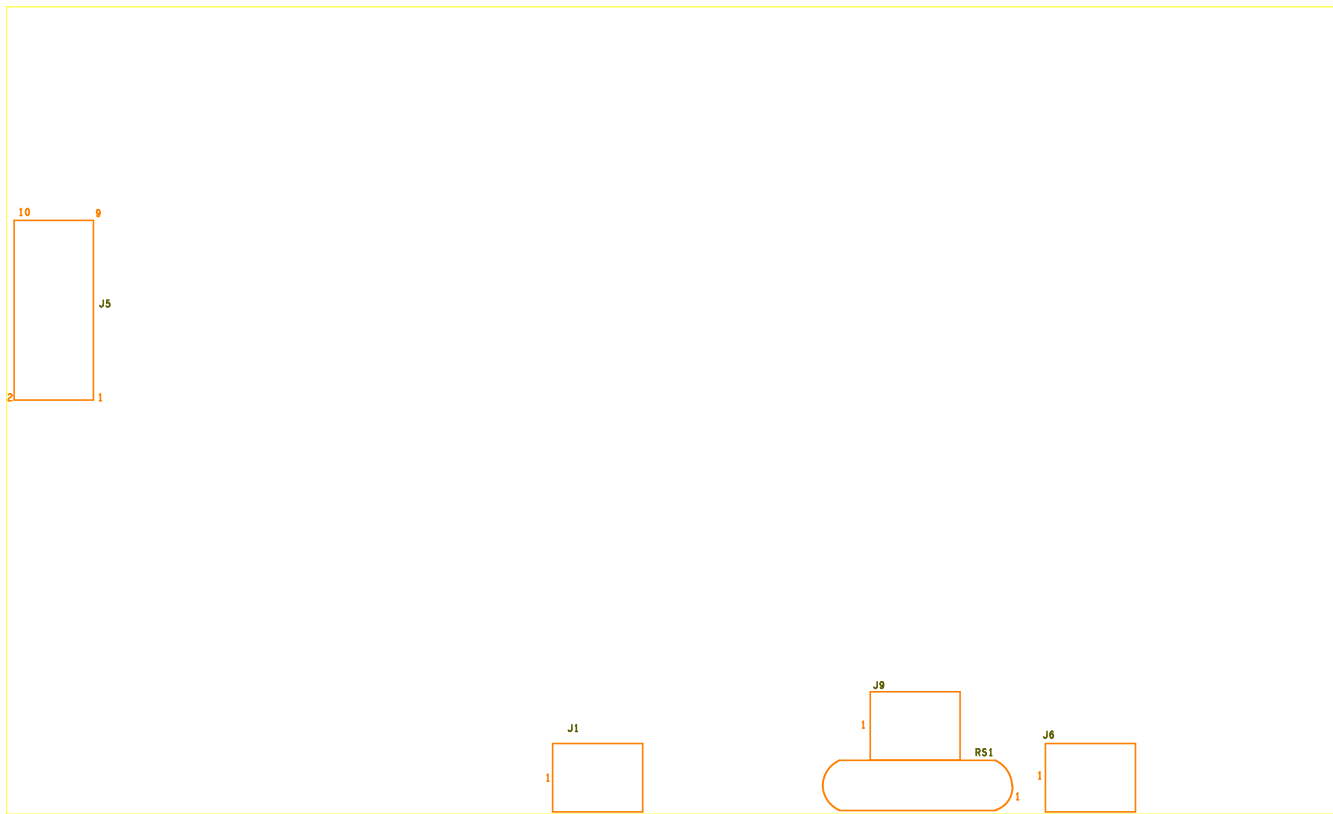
Bottom side of the PCB with shunt resistor configuration
